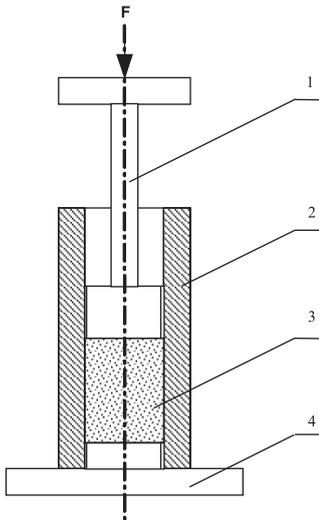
Scheme of the compression assembly: 1 – piston, 2 – cylinder, 3 – compressed material, 4 – bottom stand.
